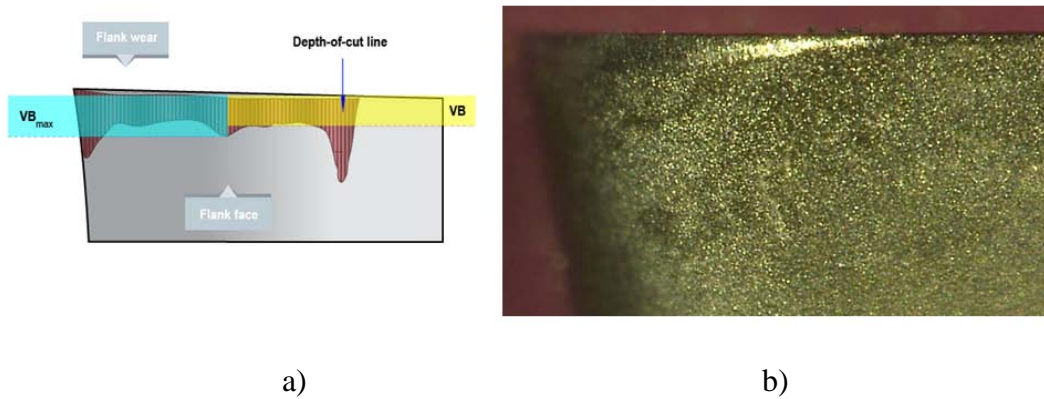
a) Scheme of the wear-land in the flank face of a cutting tool indicating the average flank wear distance (VB) and b) optical image of the flank of a diamond coated carbide turning insert evidencing the flank wear-land after cutting
